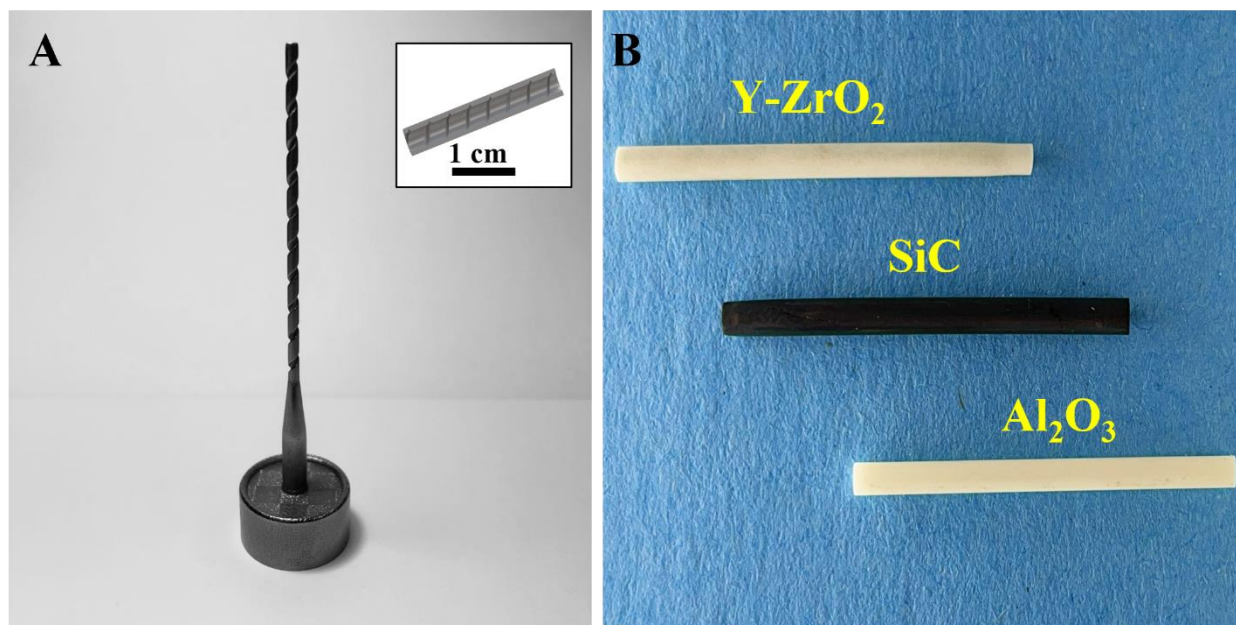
Image showing the tooling component featuring a helical thread produced using direct metal laser sintering with the inset image showing a rendering of the cross-section of the geometry fabricated using this tooling. B.) Silicon carbide SiC, alumina, and Ytria stabilized Zirconia reactor geometries fabricated using the method described in this work.
